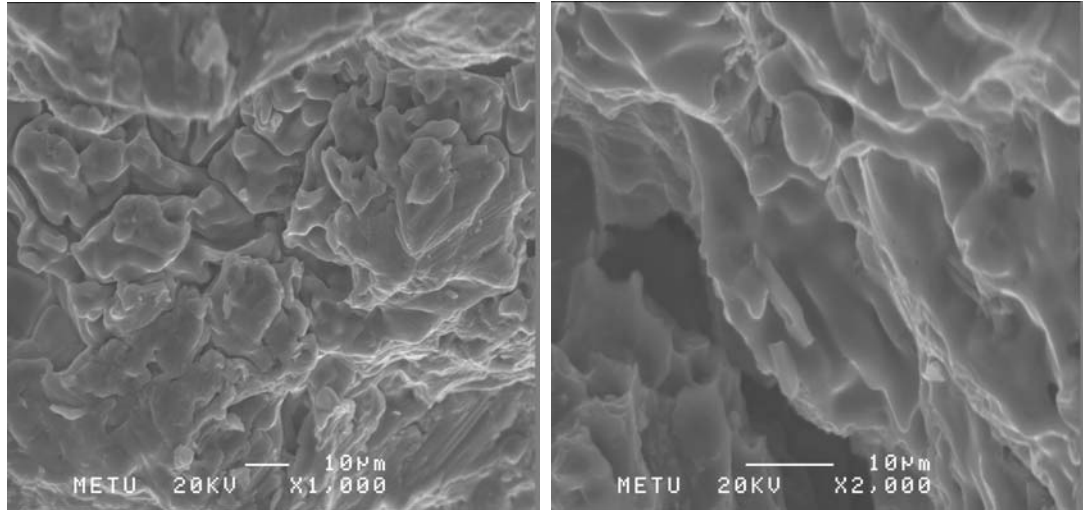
Fractography of a liquation crack of 7039-5183 aluminum alloy.
